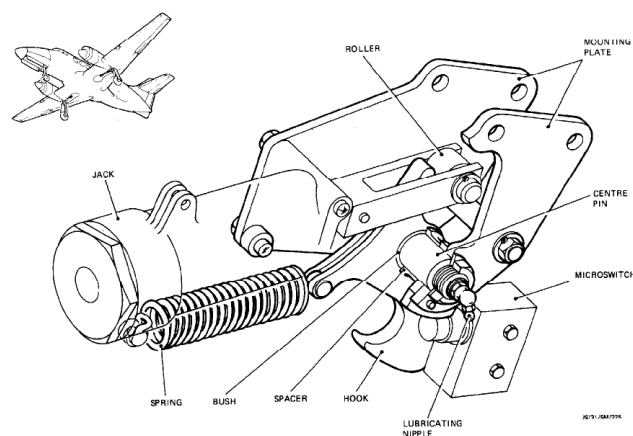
9 Jetstream 31 Uplock Assembly (Source: Cranfield University)
